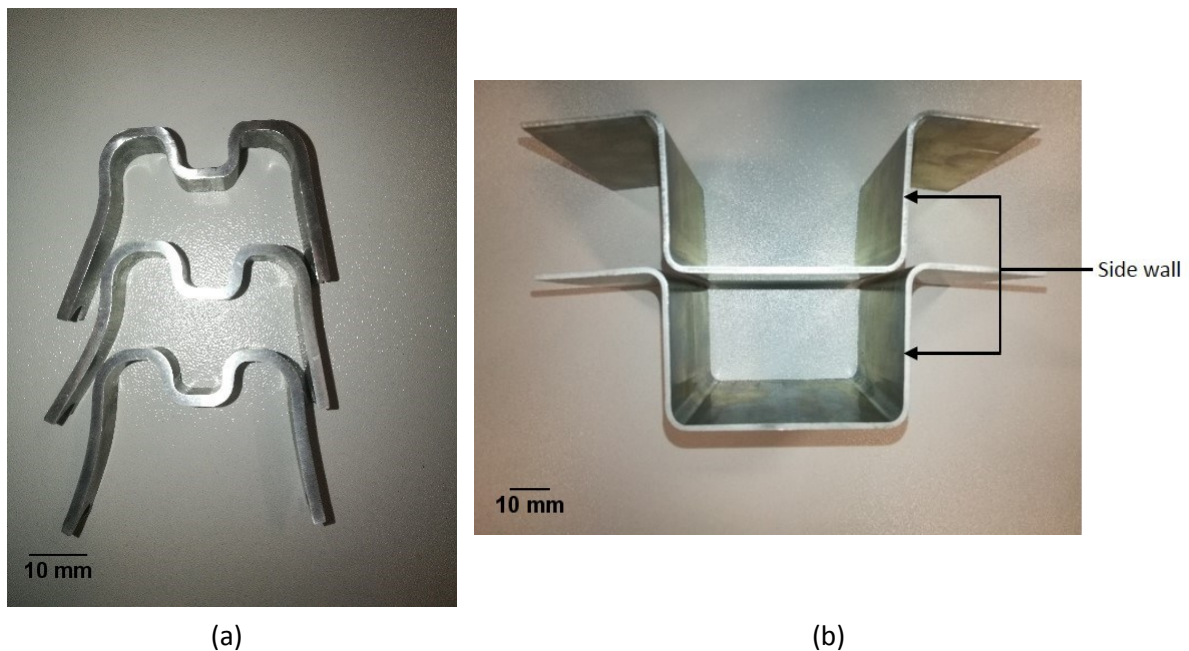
(a) formed M-shape components; (b) formed U-shape components.
